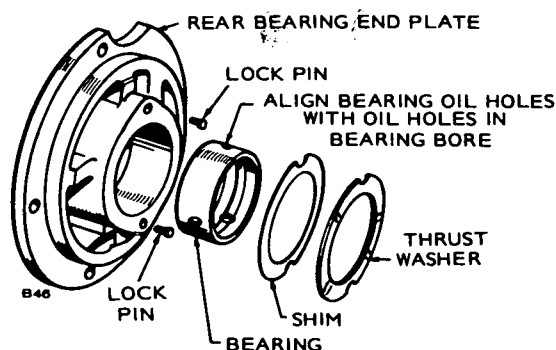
BEARINGS FOR REAR BEARING PLATE
